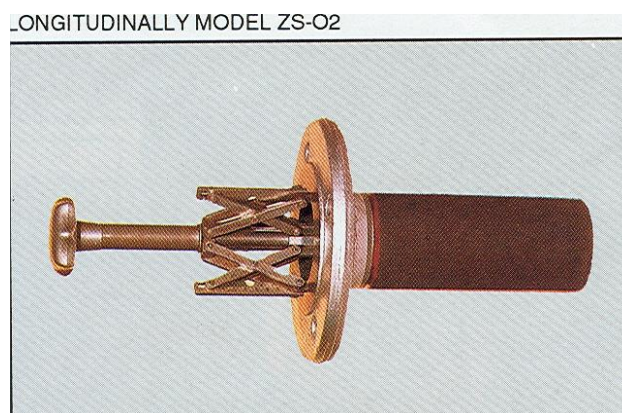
Mechanical Jig for internal centering of two tubes or flange/tube
